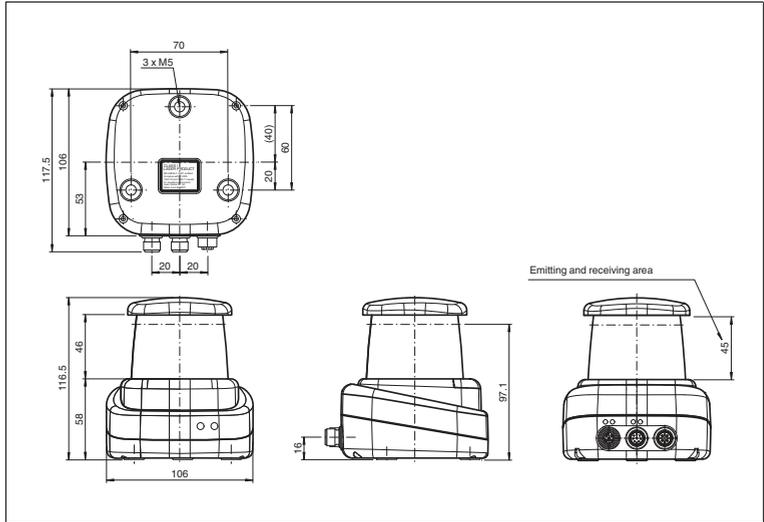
Dimensional drawing of R2000 2-D LiDAR sensor
